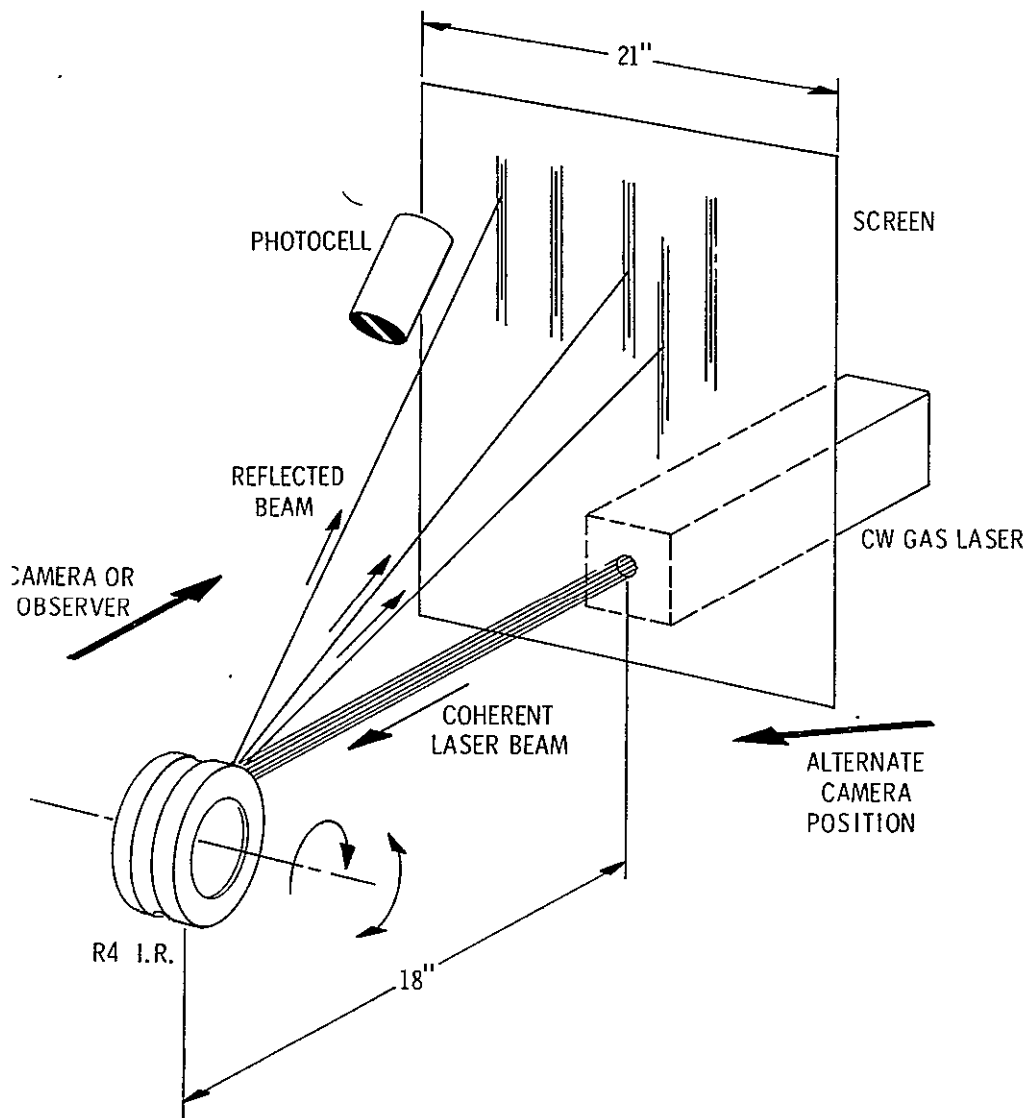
Equipment layout for race-groove examination with laser beam.
